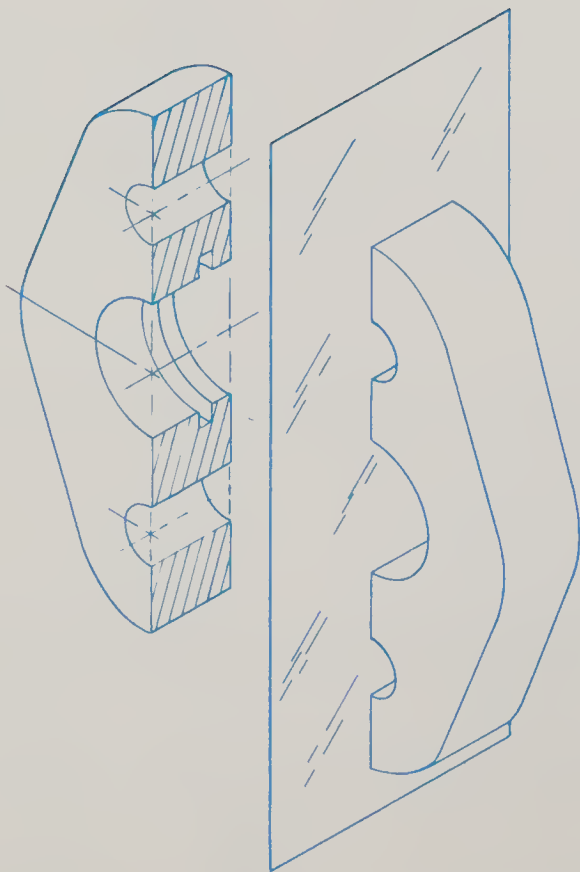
Imaginary cutting plane showing a sectional view.
